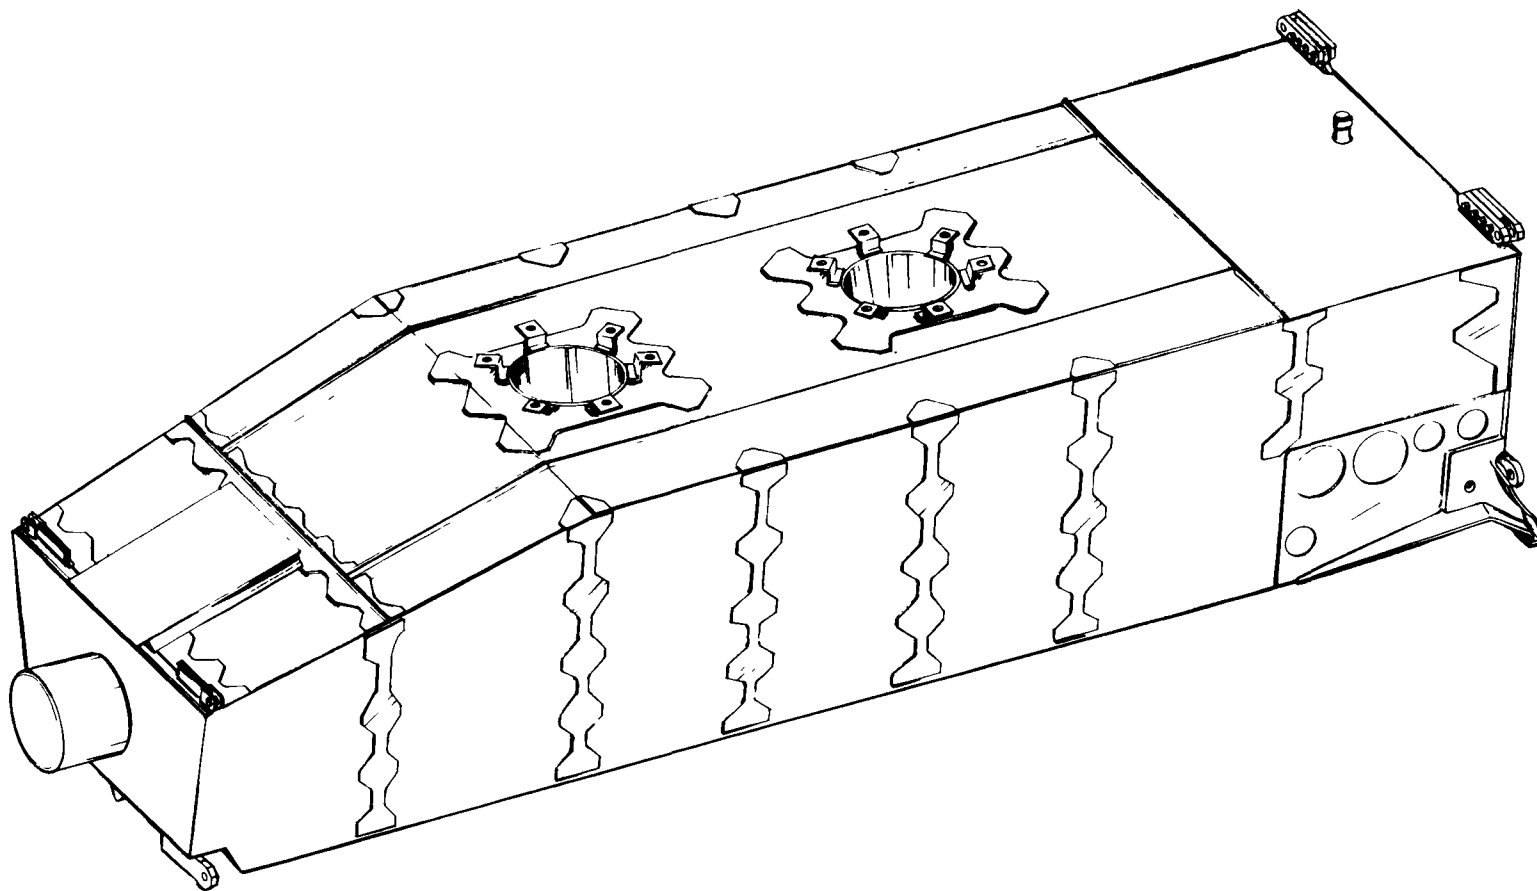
Upper half of side shield, exploded view (Dwg. DI435)
